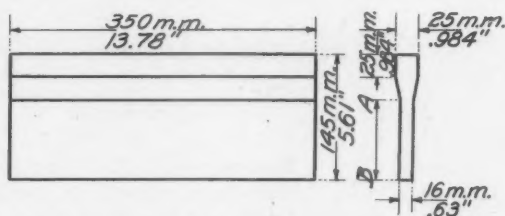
IMPACT SPECIMENS WERE MACHINED FROM THE SECTION A-B.
